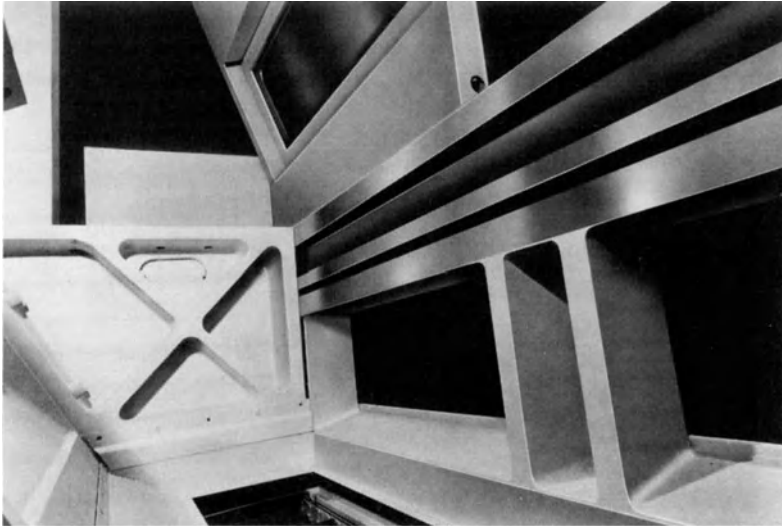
The rib and boxlike construction of the castings. [Courtesy of Cincinnati Milacron.]
